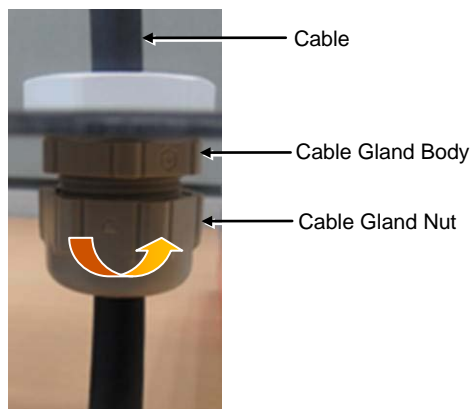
Cable Gland Assembly and Cable Installation Procedure (3)
